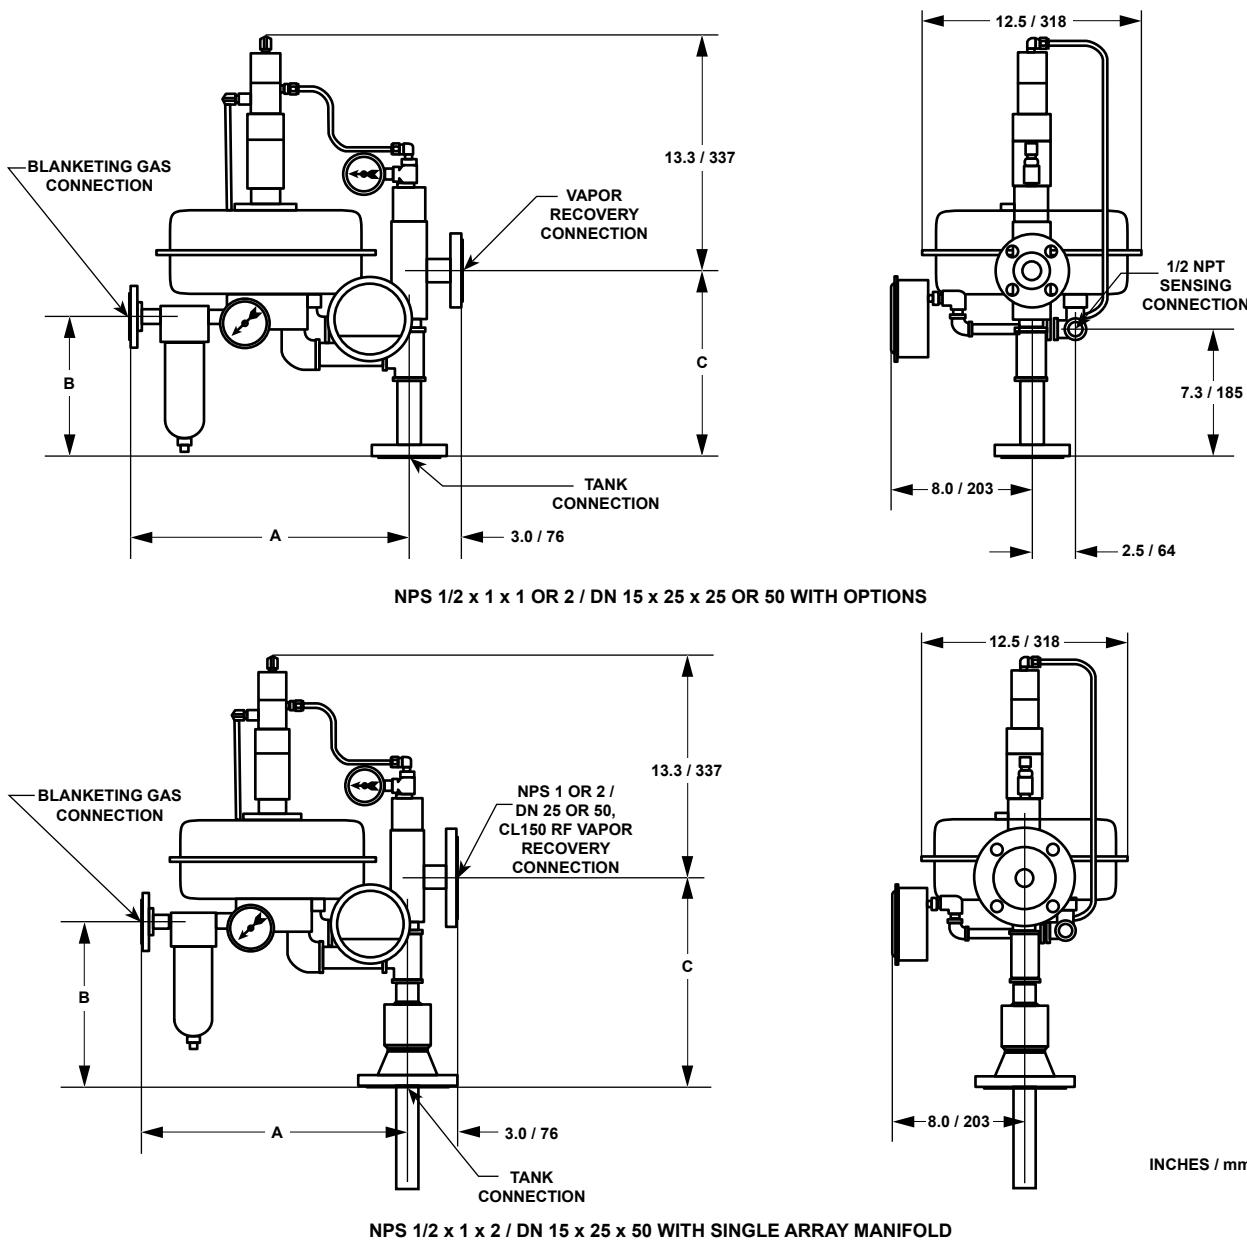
Type ACE97 Pad/Depad Valve Dimensions (continued)
